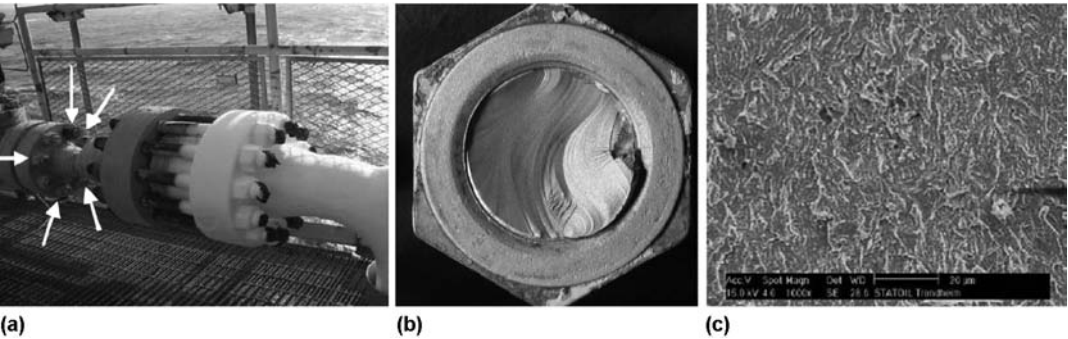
ASTM B7 low-alloy steel bolt grade. Fracture initiated along threads, with typical and pronounced beach marks (i.e., cyclic fracture propagation) and transgranular fracture mode. (a) Location of bolts in pump coupling. (b) Beach marks showing asymmetrical bending with initiation at high stress-concentration factor at bolt threads. (c) Transgranular fracture morphology
